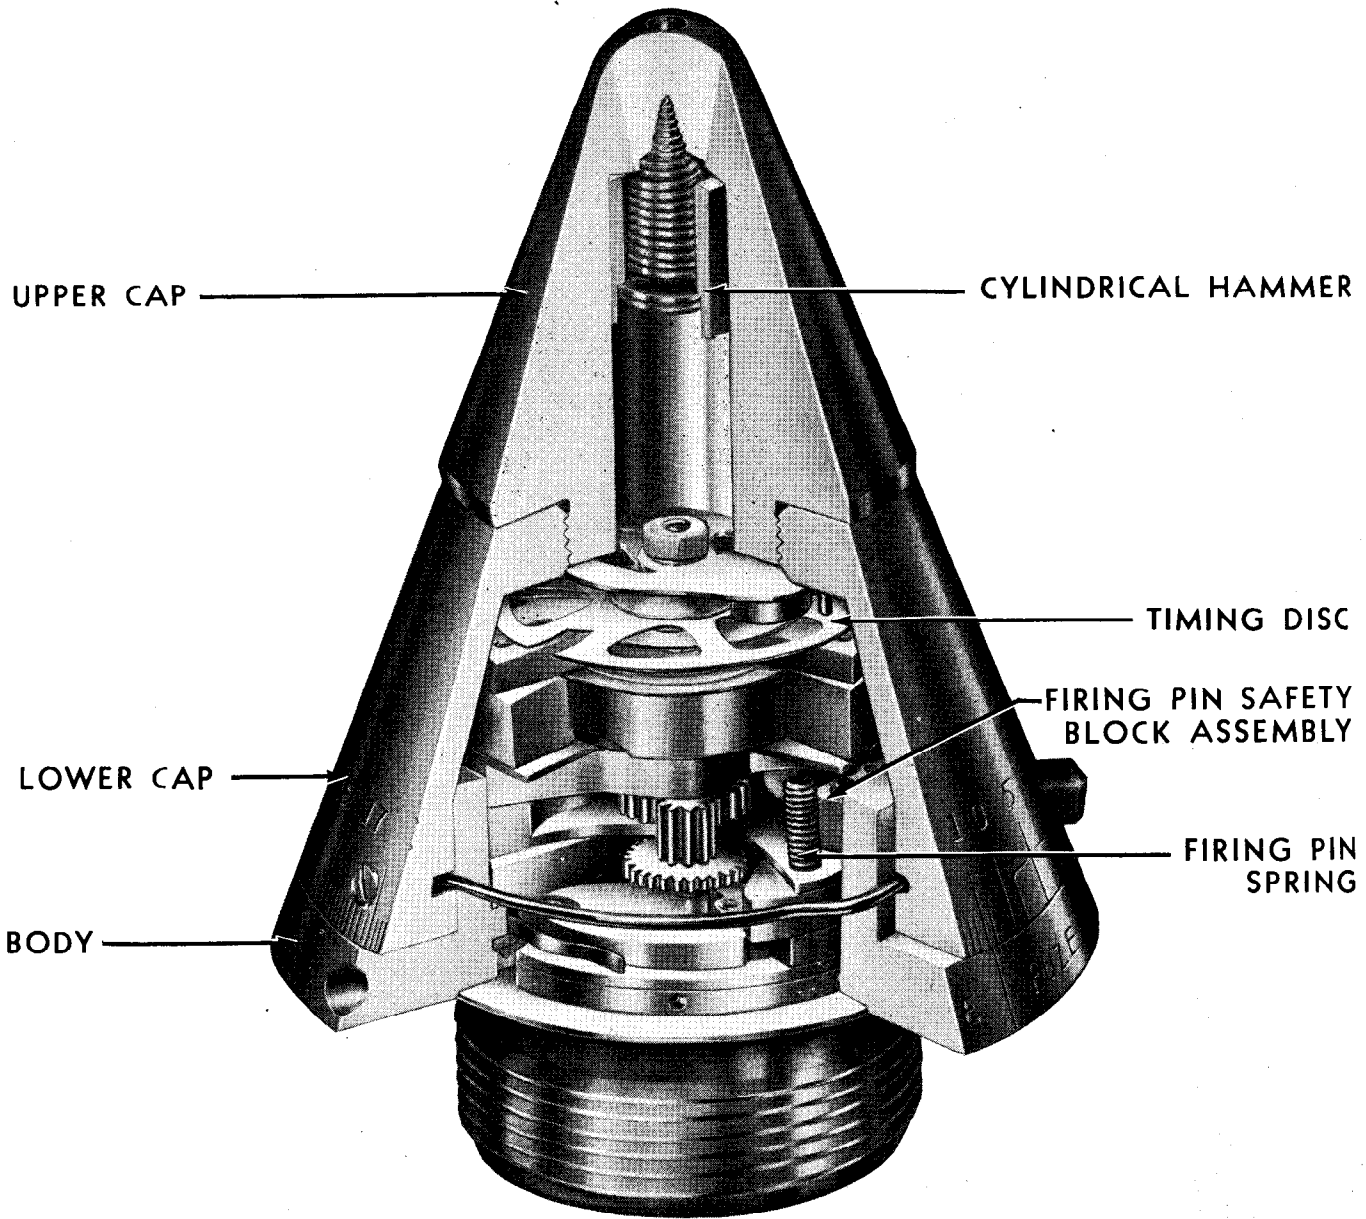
Mechanical Time Fuze Mk 42—Cut-away
